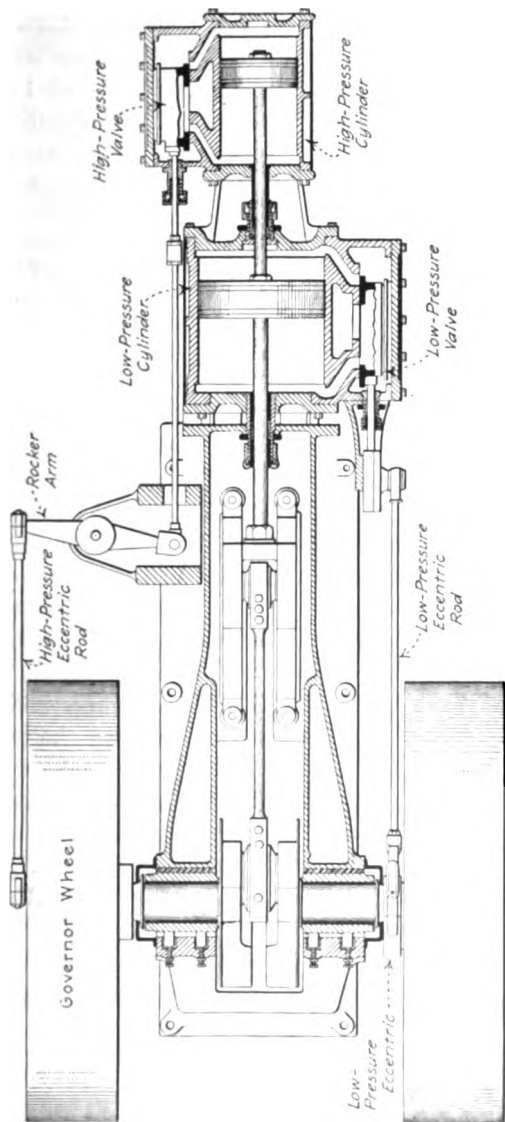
Section of Skinner tandem-compound engine showing governing of high-pressure cylinder by shaft governor.
